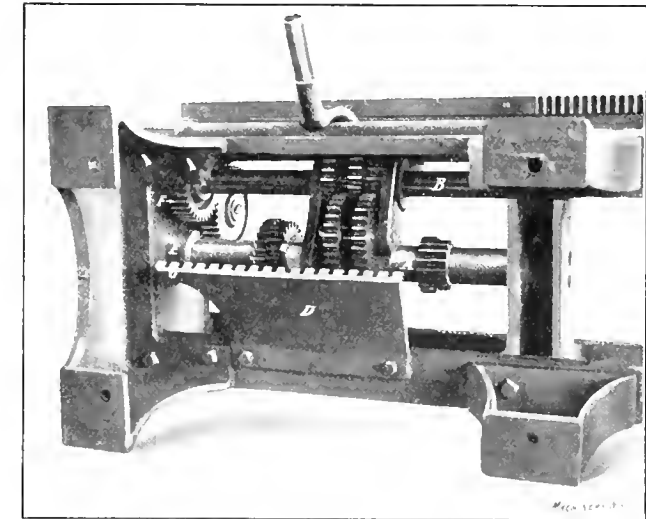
Quick-change Gear Mechanism of Lathe shown in Fig. 1
